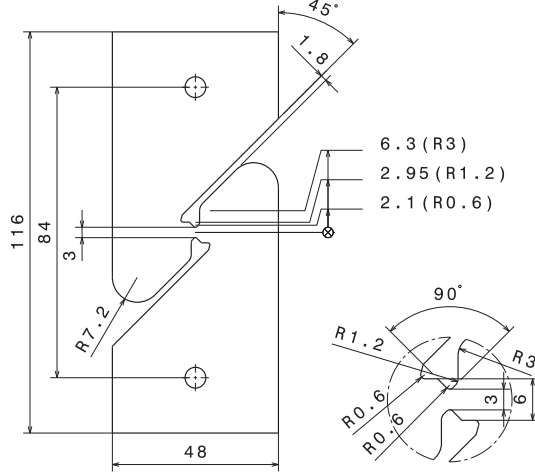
Geometry of the shear specimen with dimensions in mm.
